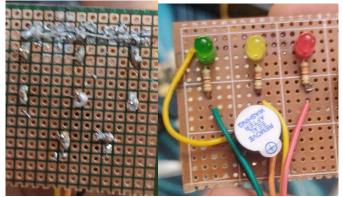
(Left) Soldering and (Right) Connection of LEDs & Buzzer
